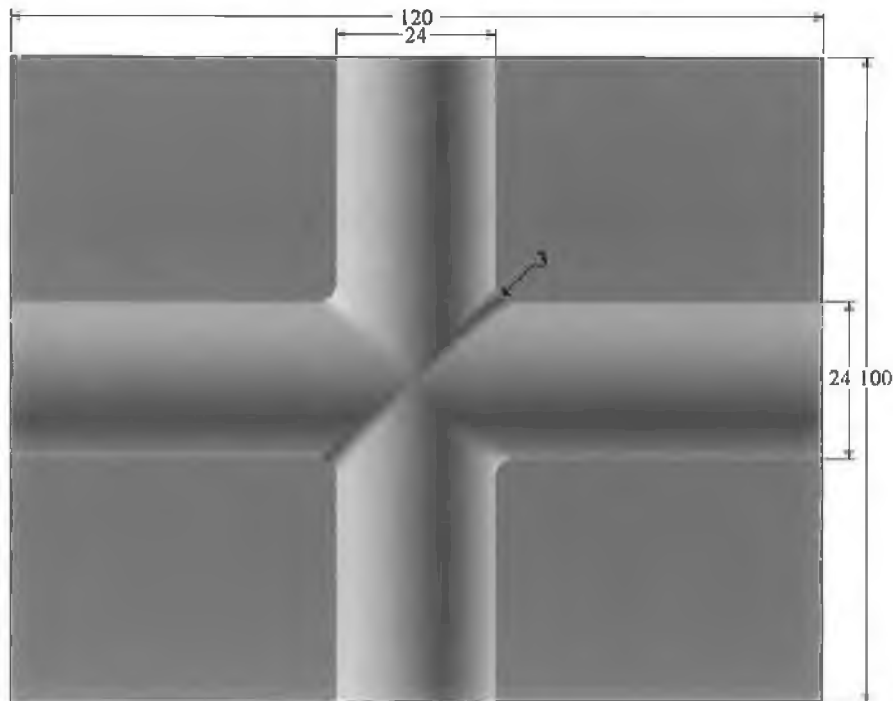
CAD model of X-branch die (all dimensions are in mm)
